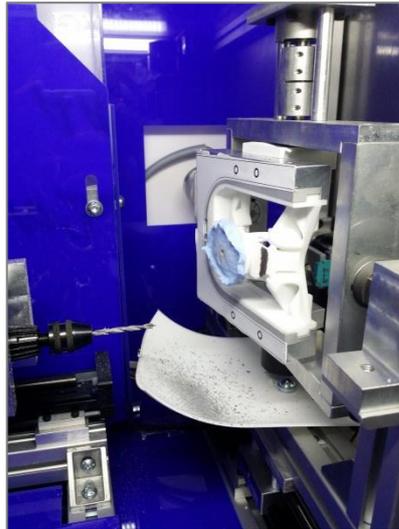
The CNC drill (fitted with sterile drill bit has been completed its modification of the sterile disposable element seen in the centre of the image. The drill and sterile disposable receptor assembly both configure themselves such that the hole drilled exactly corresponds to the pre-operative plan.
